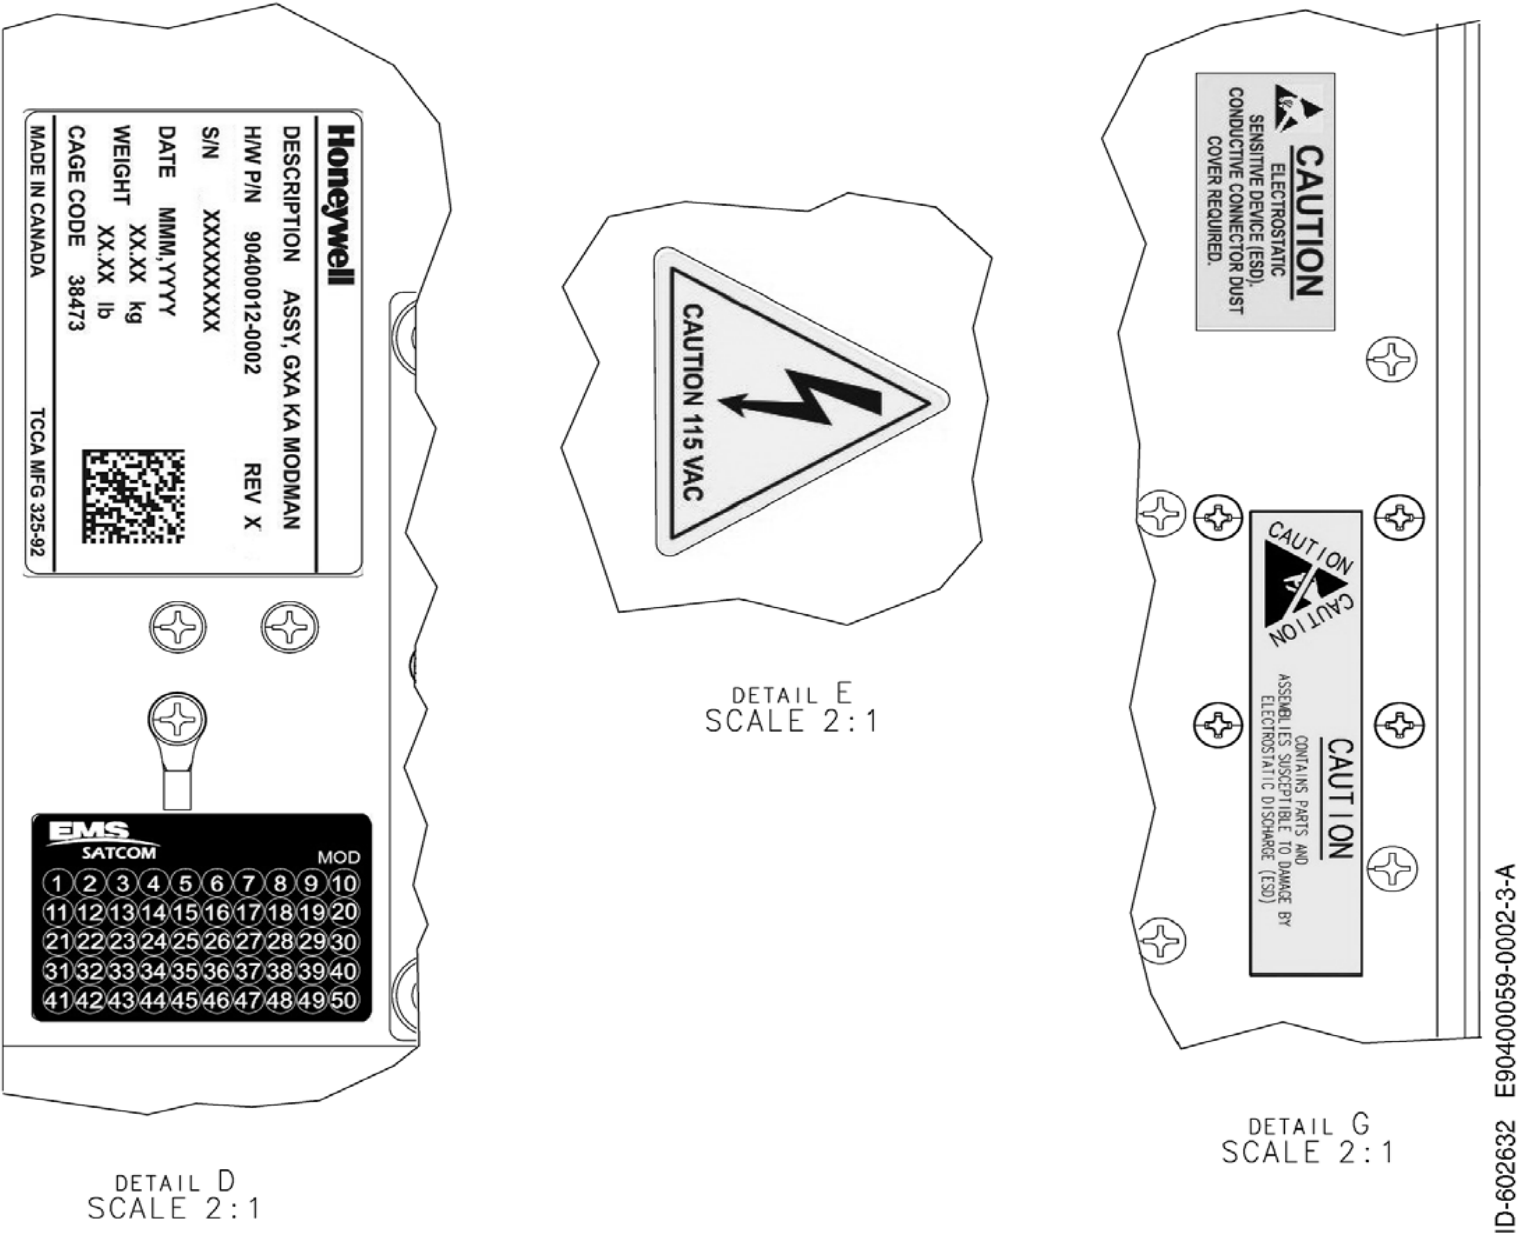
(Sheet 3 of 4) Modman Outline and Installation Drawing Variant 2 (90400059-0002, REV A)
